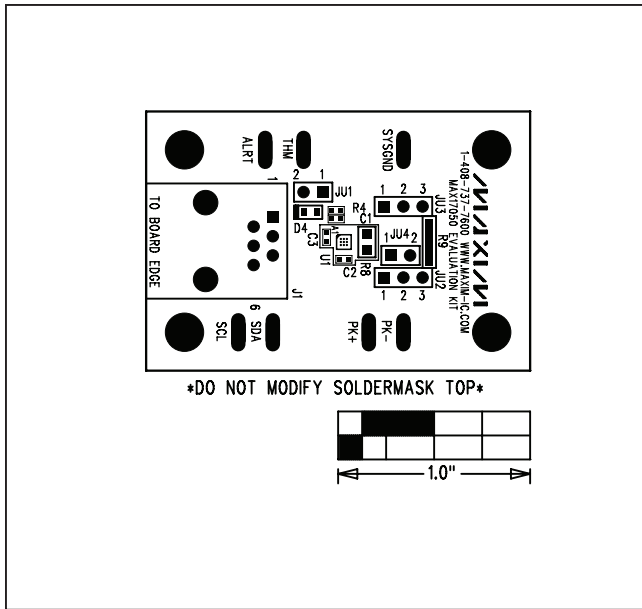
MAX17050 EV Kit Component Placement Guide—Component Side
